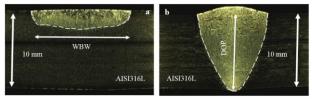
Comparison of TIG and A-TIG weldments cross sections under the same welding condition(a) Incomplete penetration using TIG welding process(b) Full penetration using A-TIG welding process
